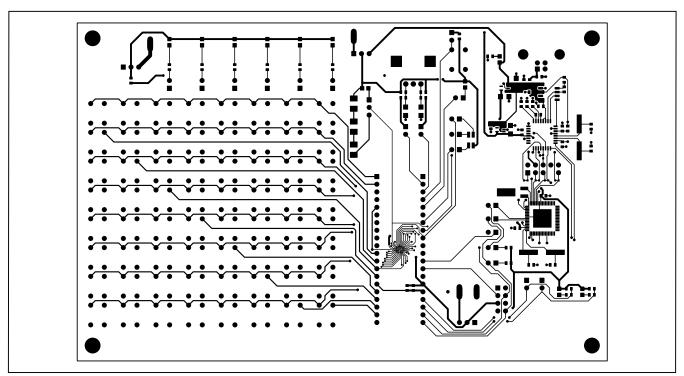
MAX7360 EV Kit PCB Layout—Component Side
